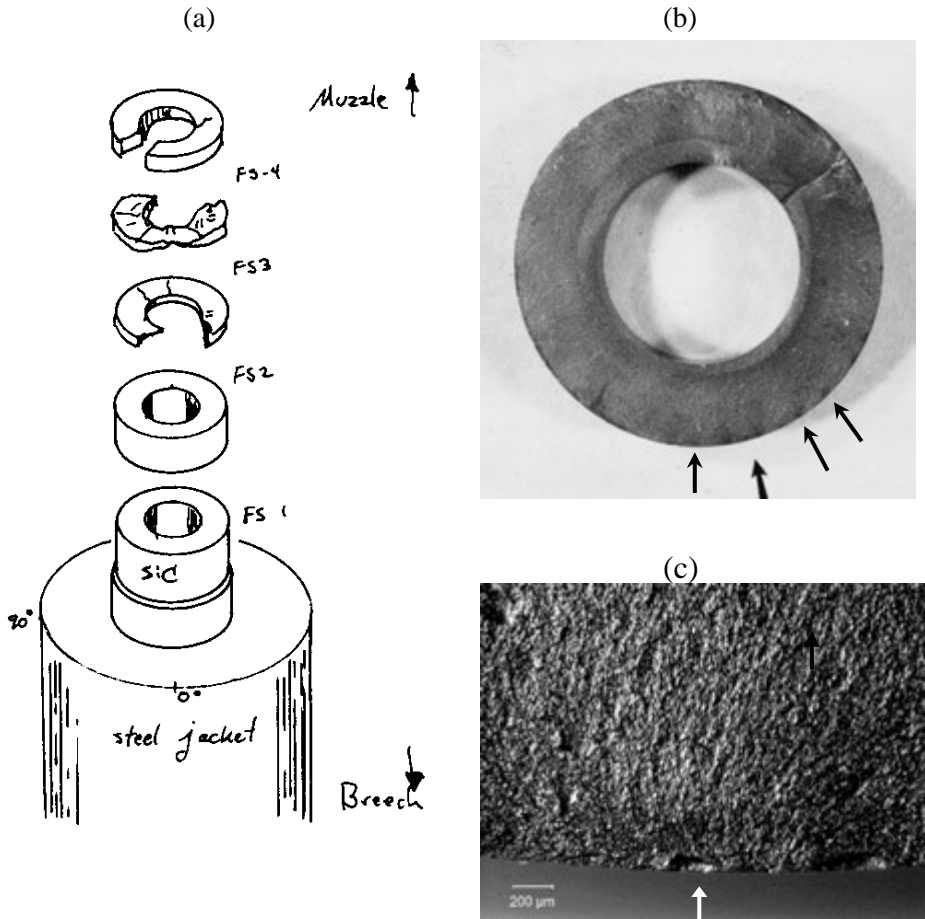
Fractured α -SiC gun barrel. (a) is a schematic sketch. (b) shows the fracture surface of one of the ring shaped fragments. Contact cracks are spaced periodically around the outer rim and appear as shadows in this view (arrows). The bore diameter is 12.7 mm. (c) shows a close-up of one of the contact cracks.
